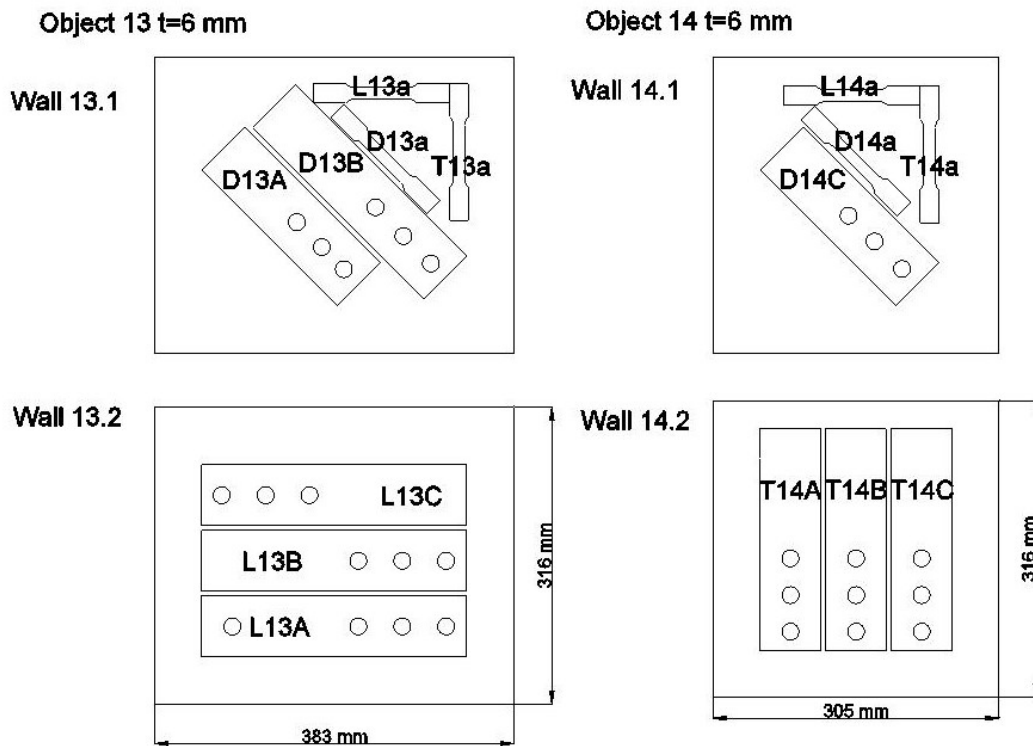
Tear-out thick specimens (printing direction horizontally)
